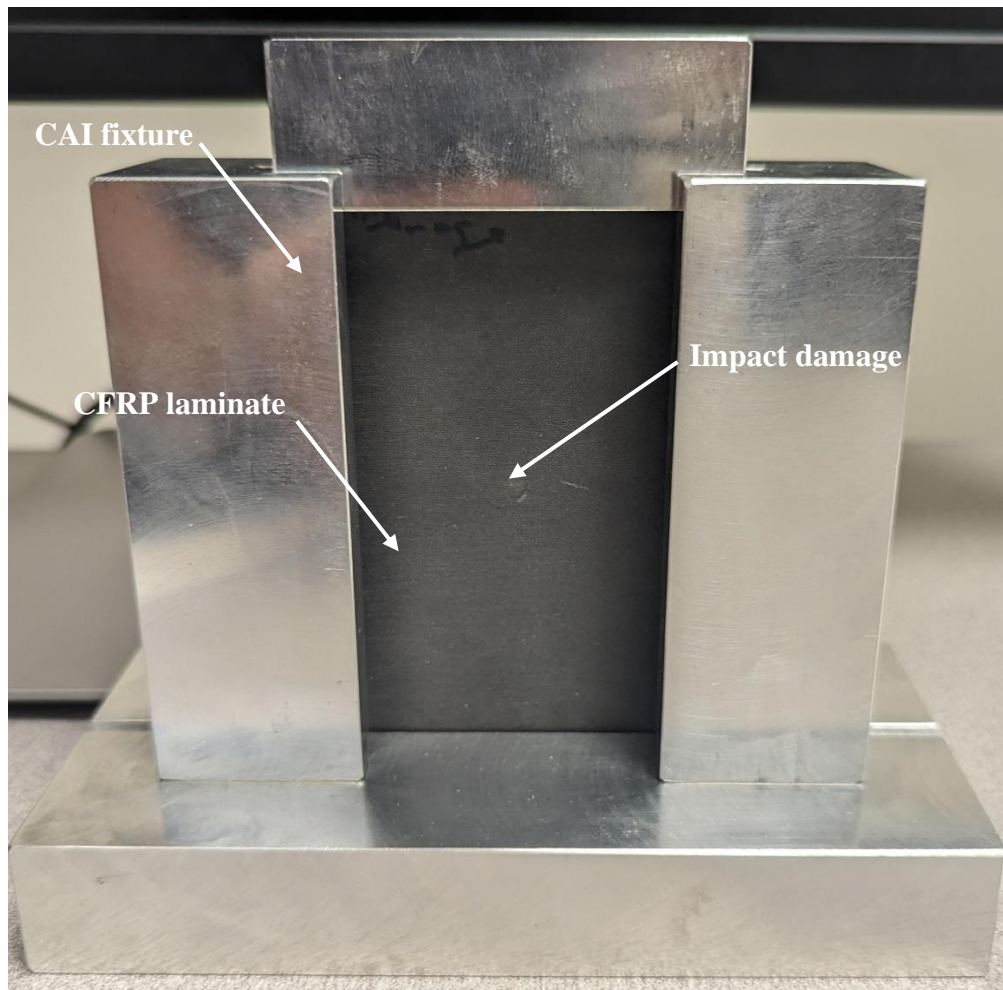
Compression after impact testing fixture with a damaged sample
